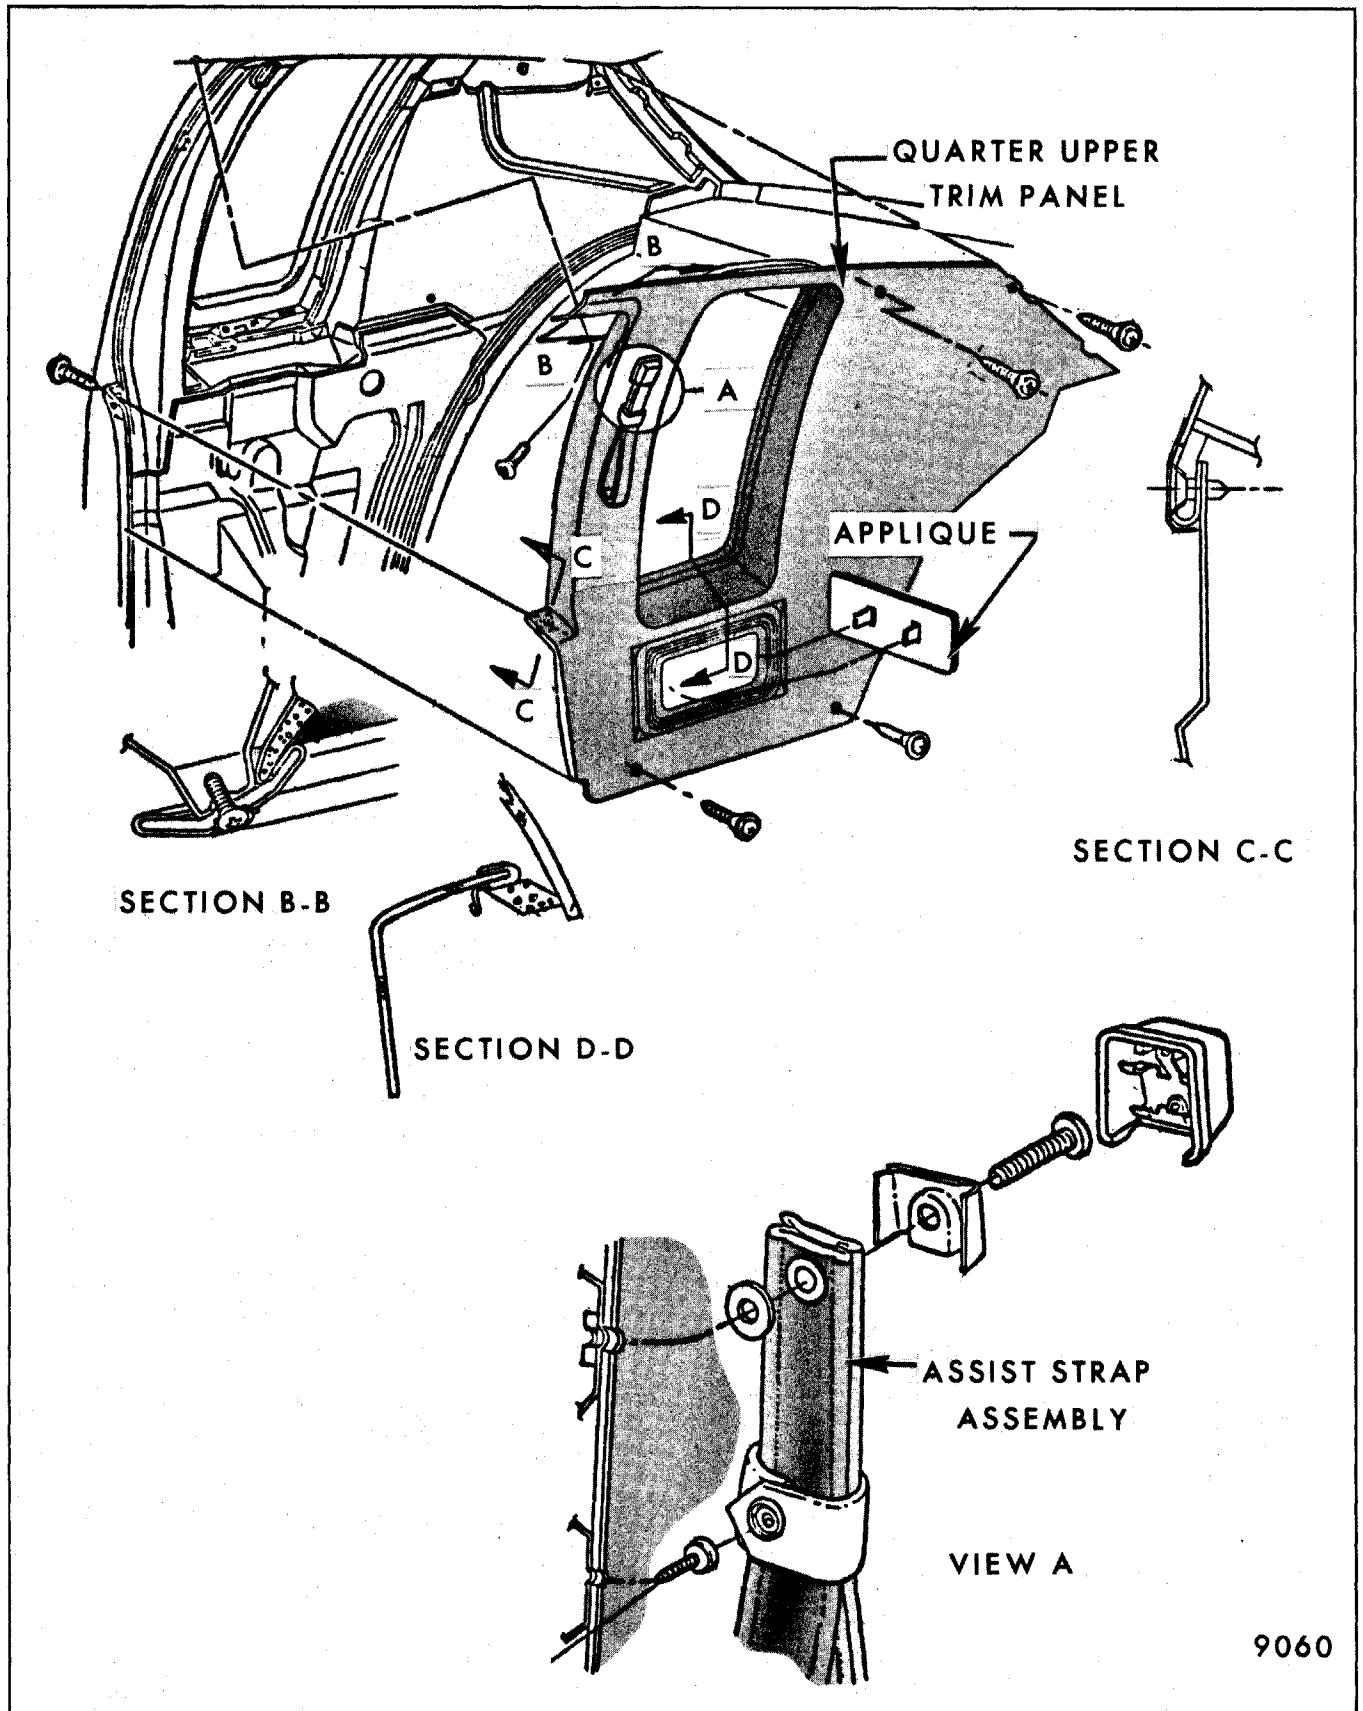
Quarter Upper Trim Attachment - Oldsmobile "E-57" Style
